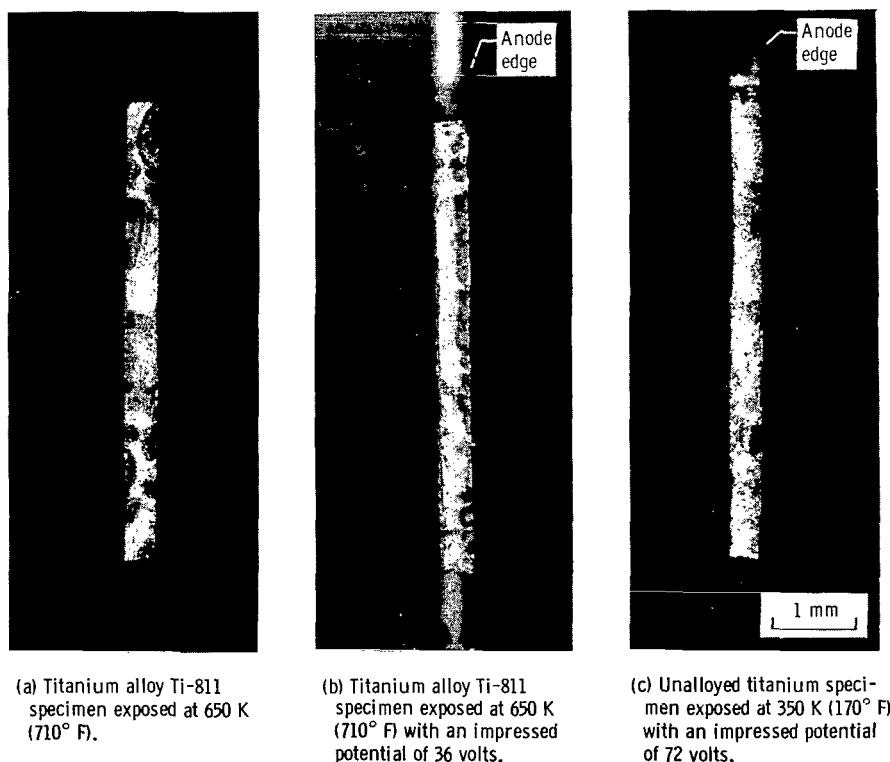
Fracture surfaces of stress-corrosion exposure specimens.
